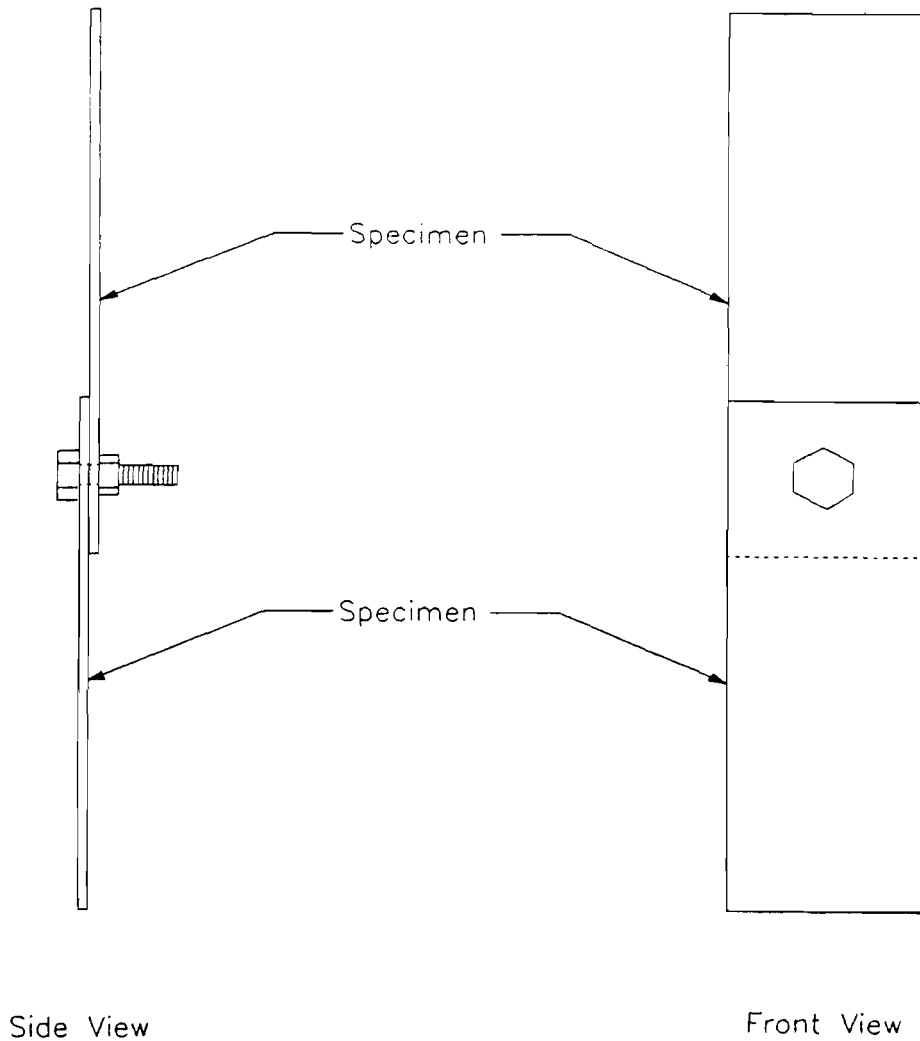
Typical Test Assembly (Type A Specimens Shown).
